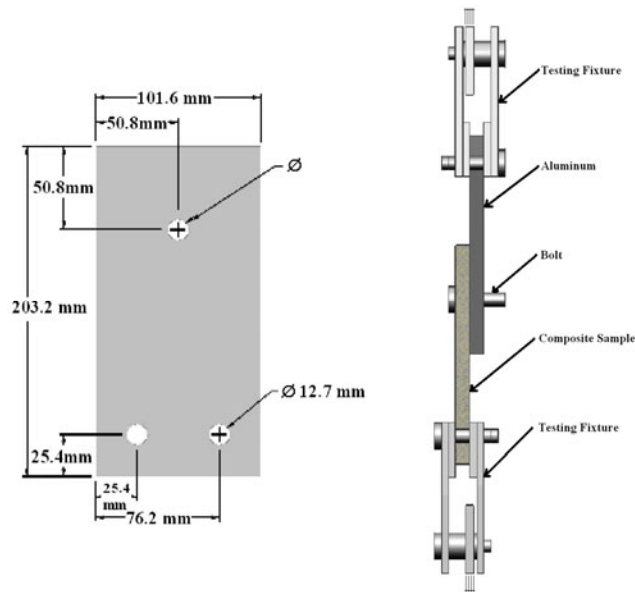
Sample Dimensions and Test Configuration for Single Lap Shear Joint Testing.
